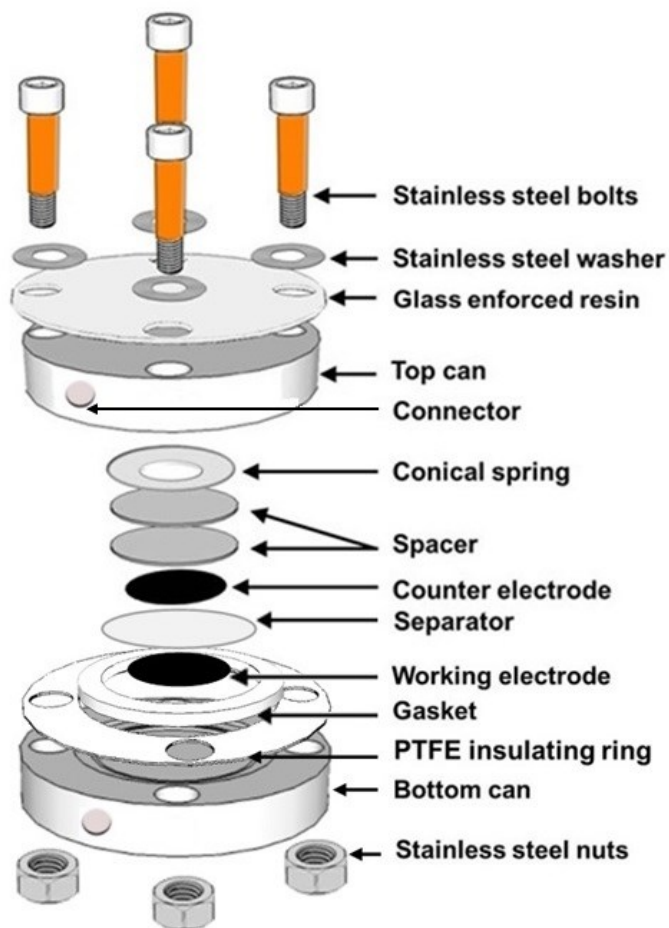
(a): Exploded view of a 2-electrode Conflat cell
